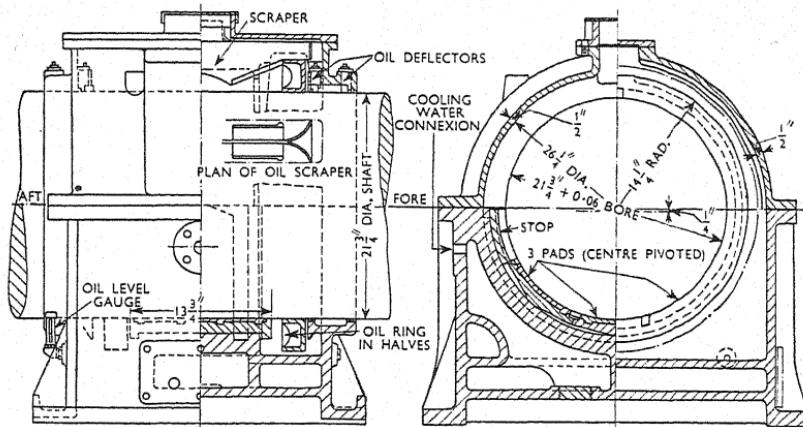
Pivoted-Pad Self-lubricating Bearing for Tunnel Shafts in the Quadruple-Screw 60,000 s.h.p. Liner *Empress of Britain
